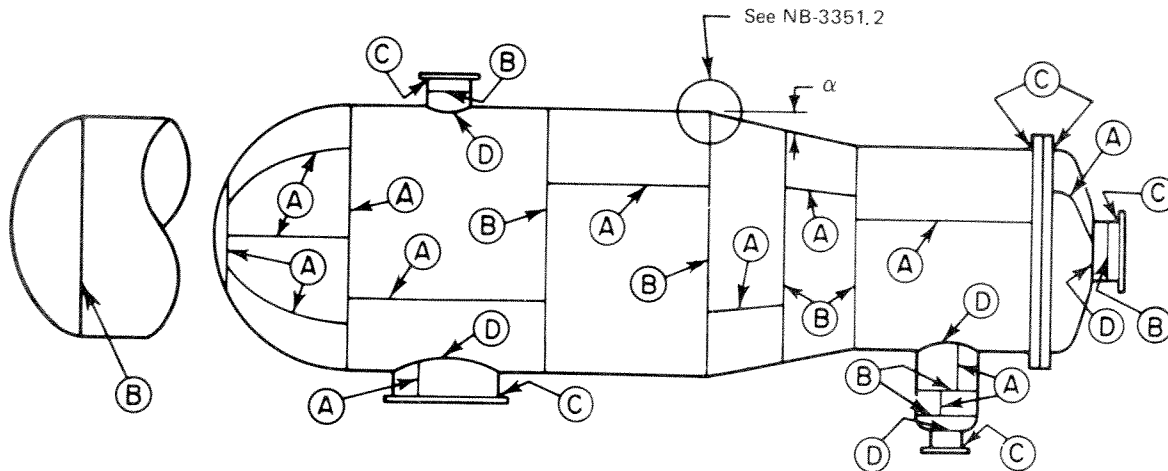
WELDED JOINT LOCATIONS TYPICAL OF CATEGORIES A, B, C, AND D
